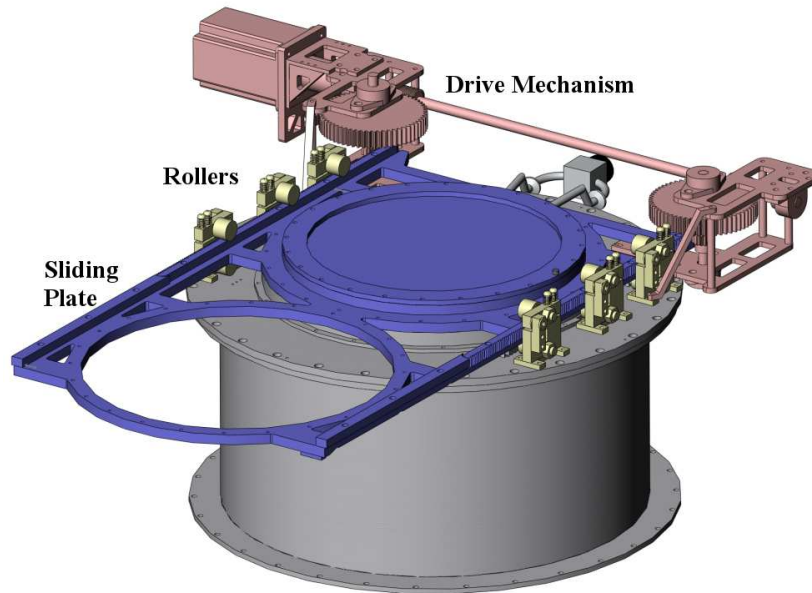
DWM design model with sliding plate (blue), drive mechanism (pink), and sliding plate rollers (yellow) highlighted.
